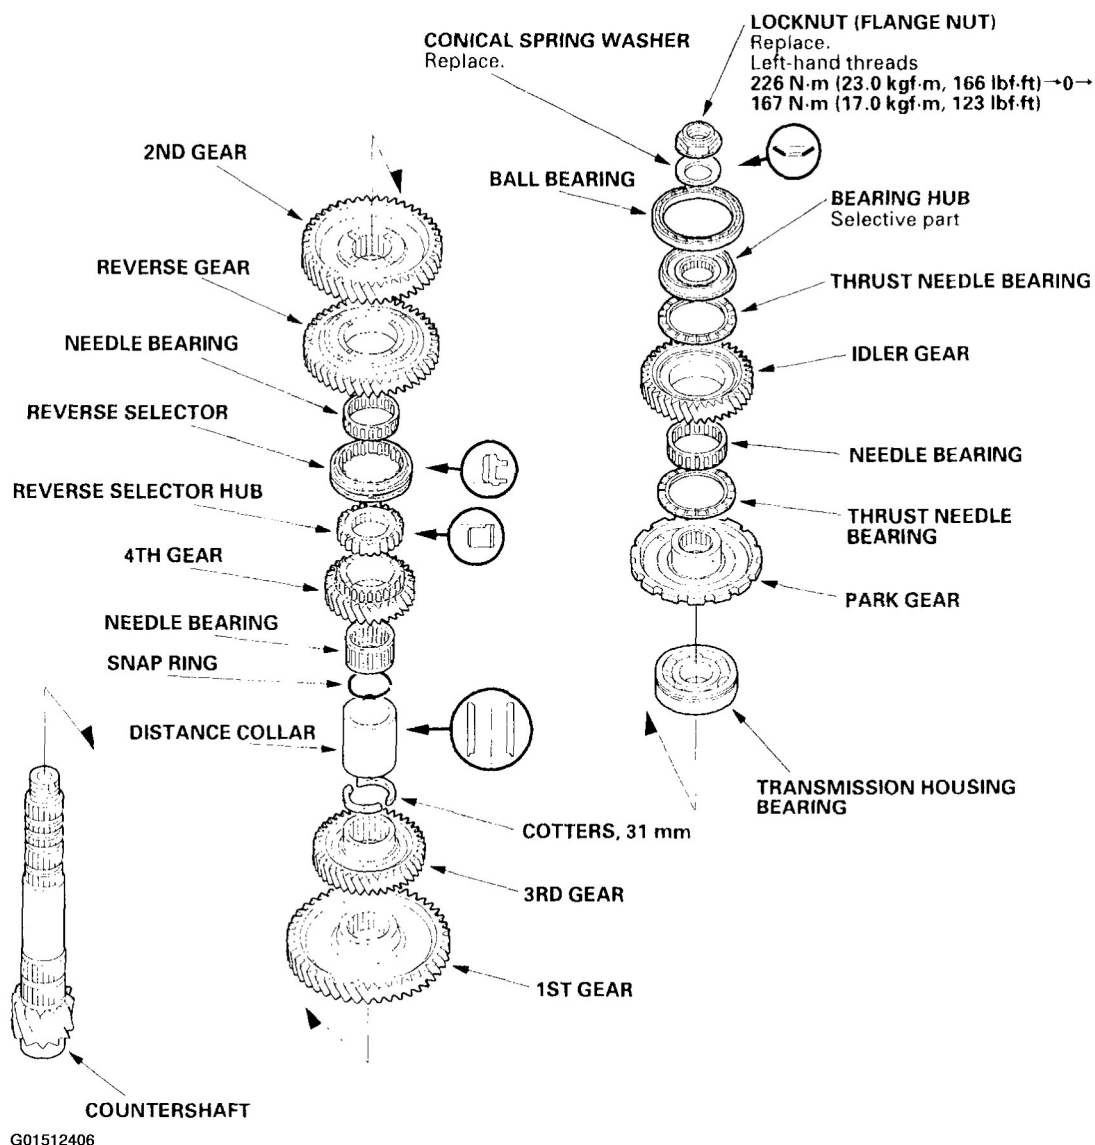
Exploded View Of Countershaft Assembly With Torque Specifications
